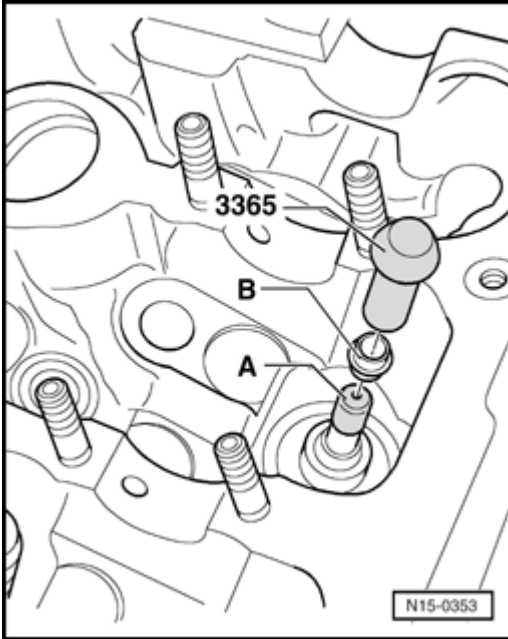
Plastic Sleeve, Valve Stem Seal And Valve Stem Seal Driver 3365
